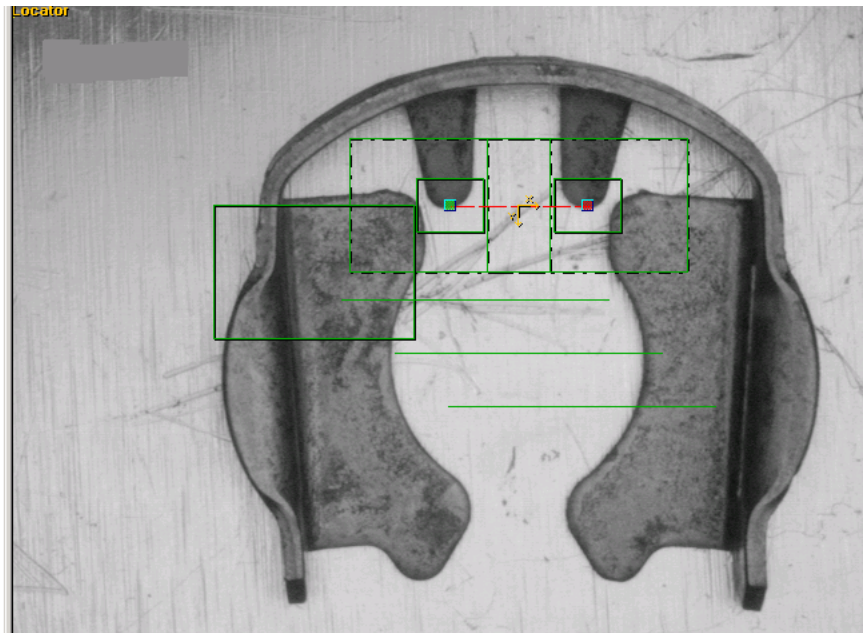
Using Measurement Tools in an Inspection Job Tree
